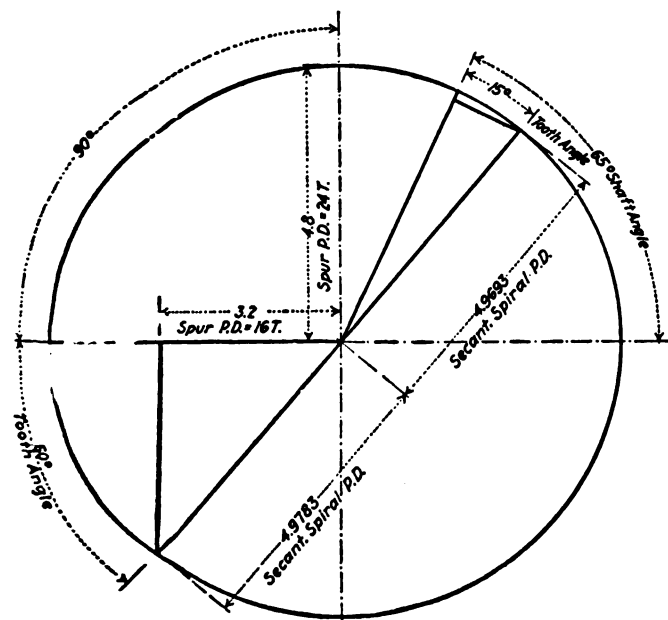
ACCURATE SOLUTION OF A GEAR PROBLEM
